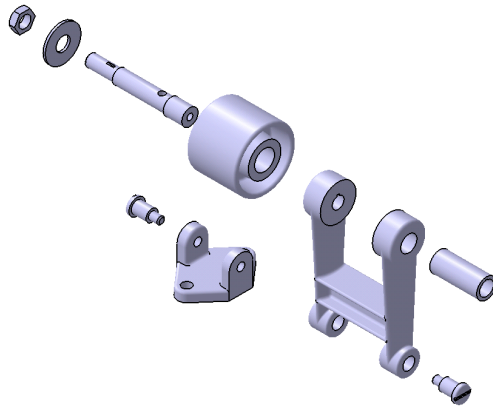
Figure showing the exploded assembly with Constrained selected as the type
